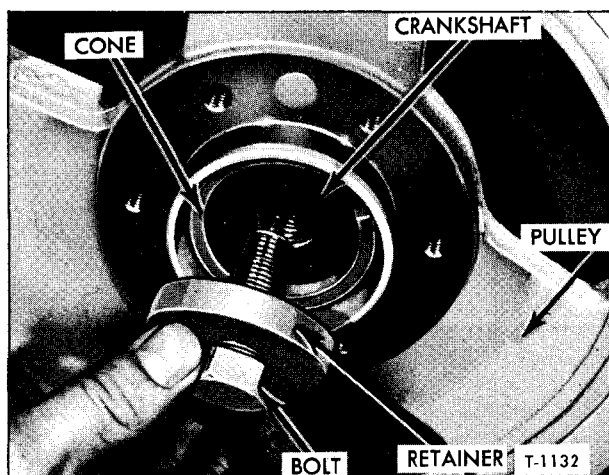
Crankshaft Damper Retaining Parts (Typical)
